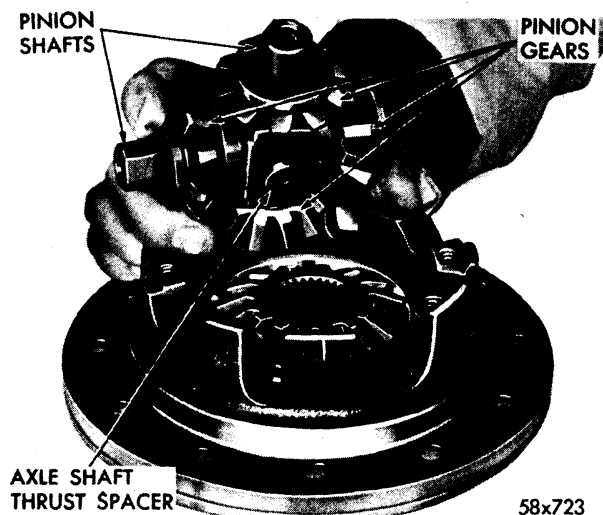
Removing or Installing Pinion Shafts and Pinion Gears
